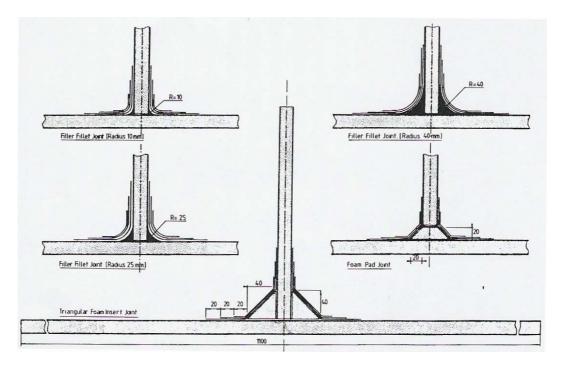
tee joints for composite sandwich structures (Violette and Shenoi 1990).
